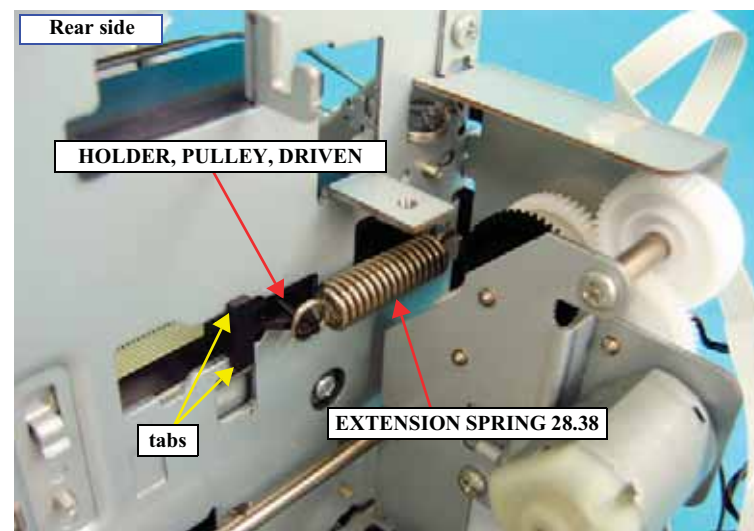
Removing the EXTENSION SPRING 28.38 and HOLDER, PULLEY, DRIVEN
